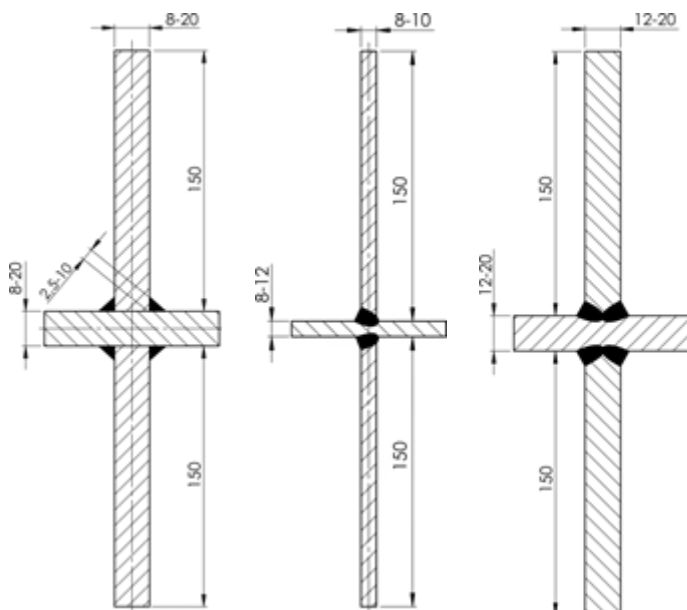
Cruciform joints with a) fillet welds made using the standard process, b) one-sided butt welds and c) two-sided deep-penetration welds
